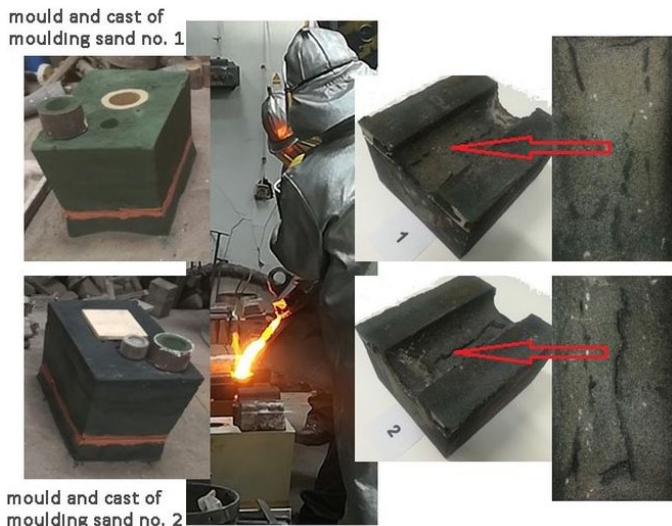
Moulds and castings of moulding sands with (1) furfuryl-resole resin and (2) two-component binder (with marked area of intensive influence of moulding sand on casting's surface)
